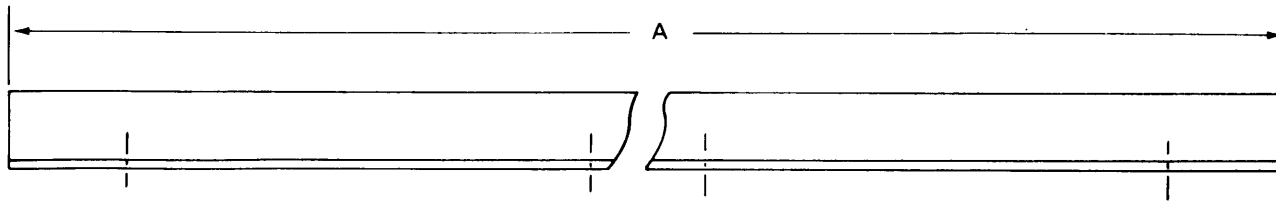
Power Cable Assembly, 11021166, Unit 1, M35A2.
